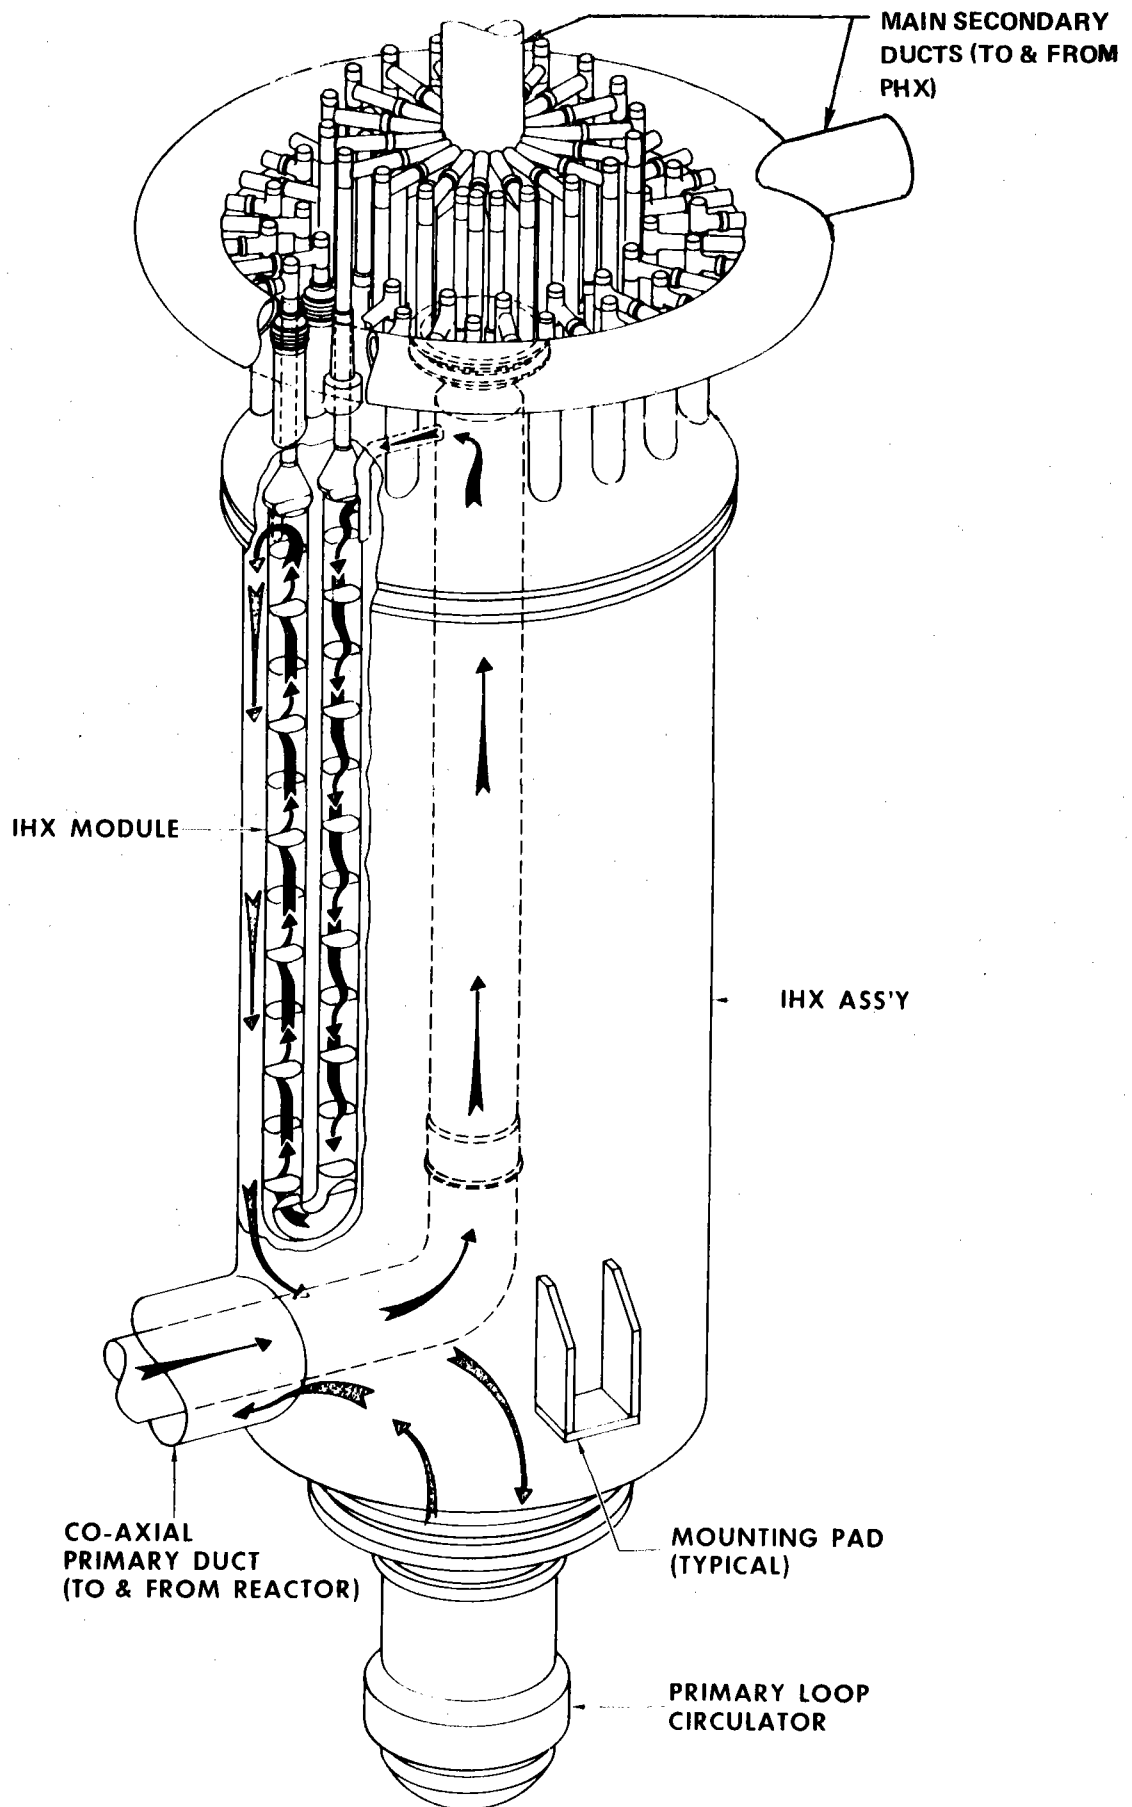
U-Tube Style Intermediate Heat Exchanger Assembly (Reference Design).
